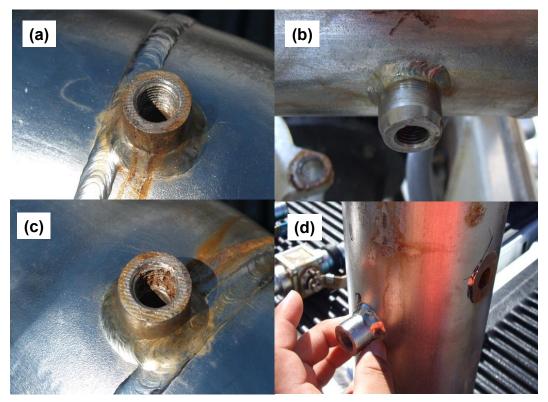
316 stainless steel threadolet. (b) Super duplex (Zeron 100) threadolet. (c) Threads corroded away on the 316 threadolet. (d) Wire - Electrical discharge machining is used to properly remove the threadolet.
